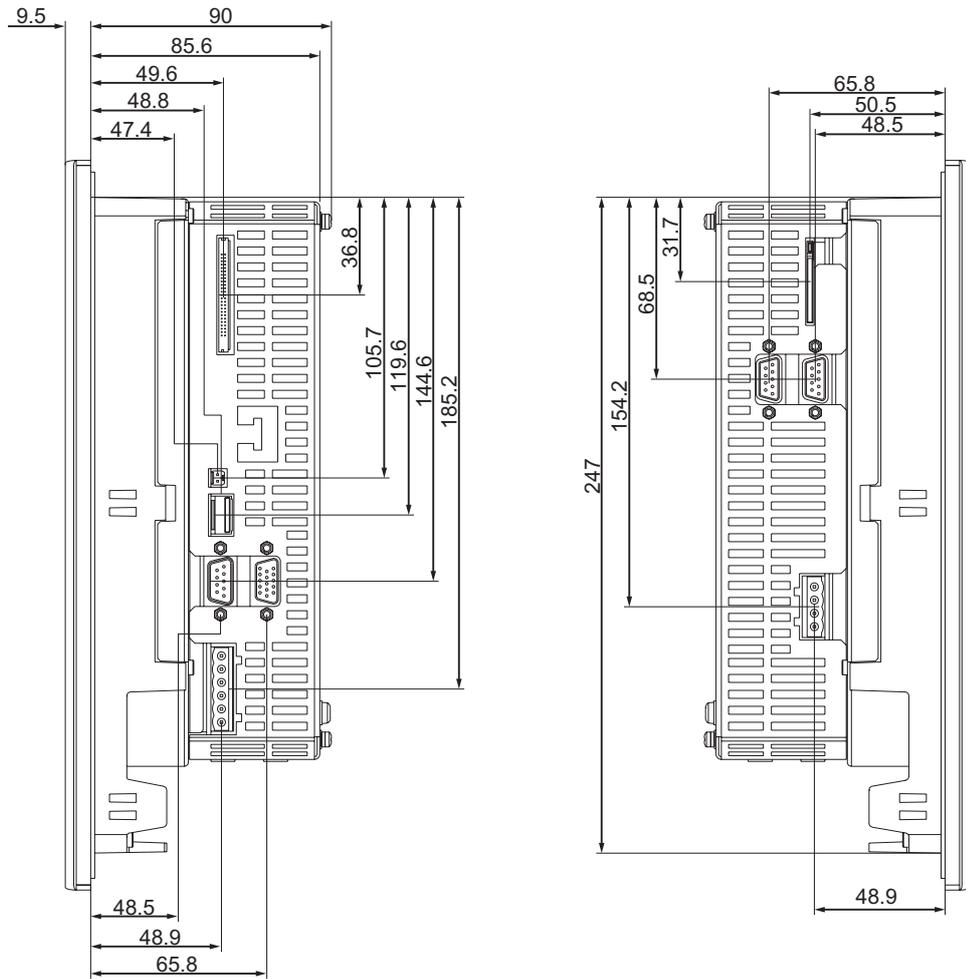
Dimension drawings for the C7-636 Touch (dimensions in mm)
